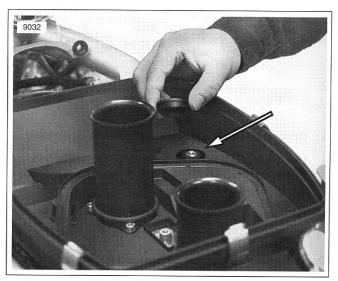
Air Bleed Plug @ 9-11 Nm (80-97 in-lbs)
